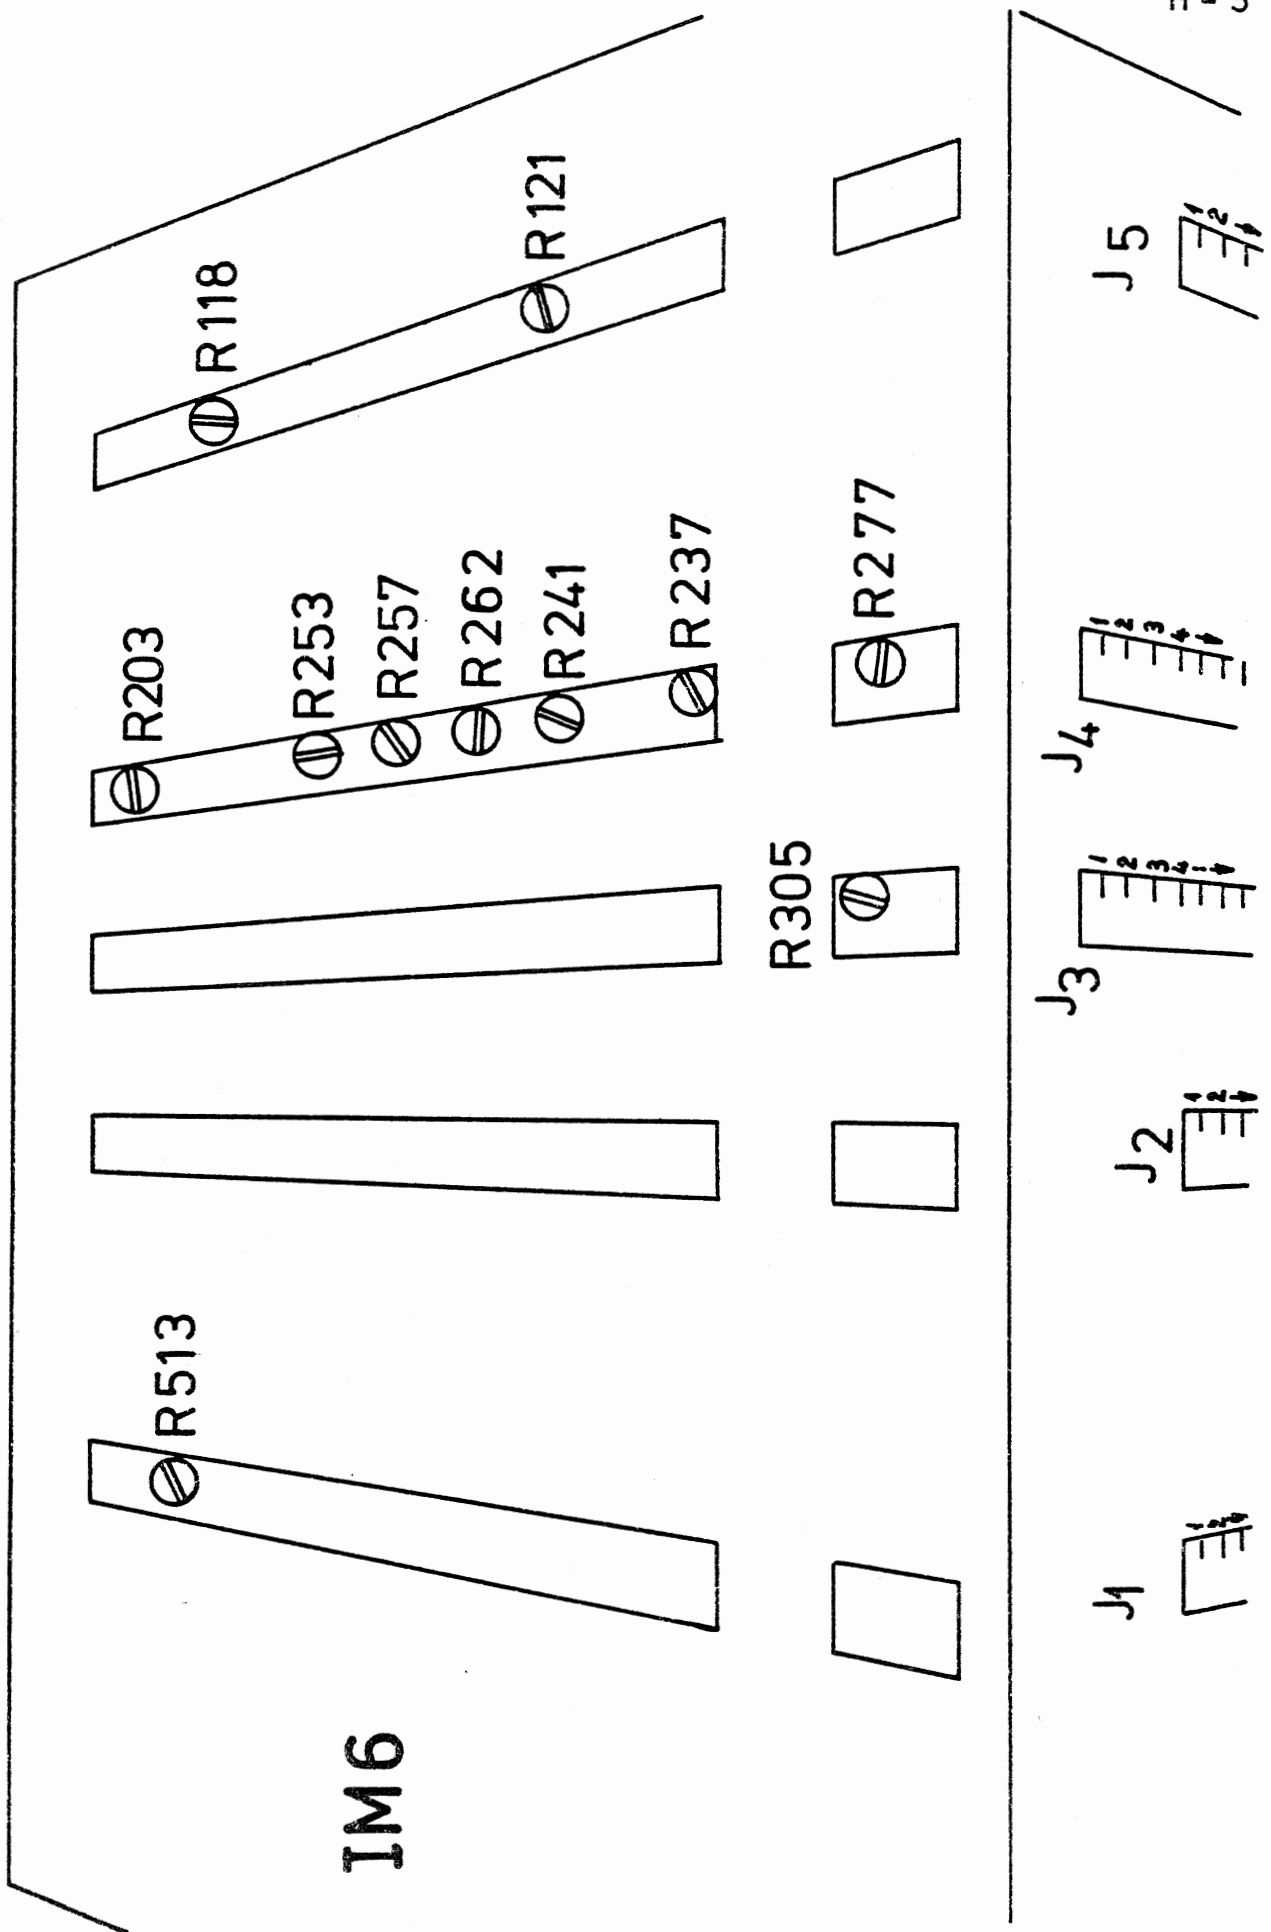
Location of printed circuit boards and trimmers. Trimmer R2, not shown, is located on the back of the meter.
